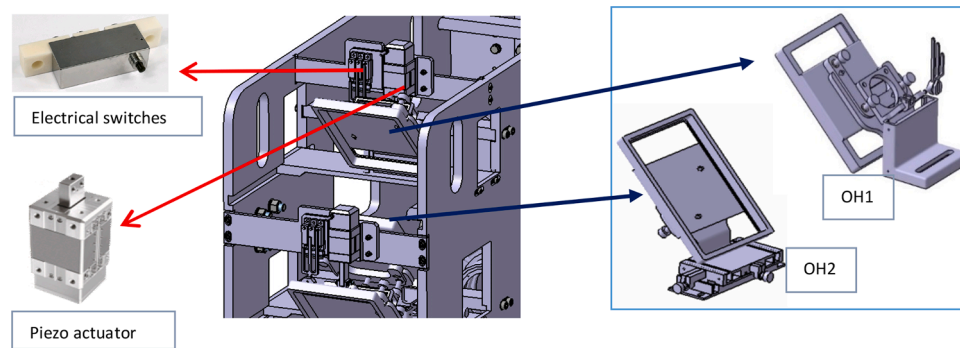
Mechanical setup of the OH mirrors, piezo actuator and electrical switches.
